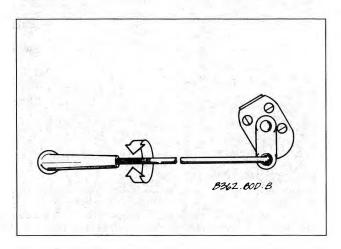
Air recirculation flap control rod and motor. Adjust flap by unscrewing motor and turning to change length of rod.
